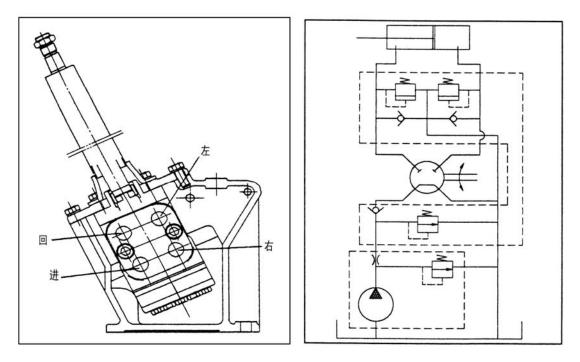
Position of fuel pipe union Fig.26 Principle Figure of hydraulic Steering
